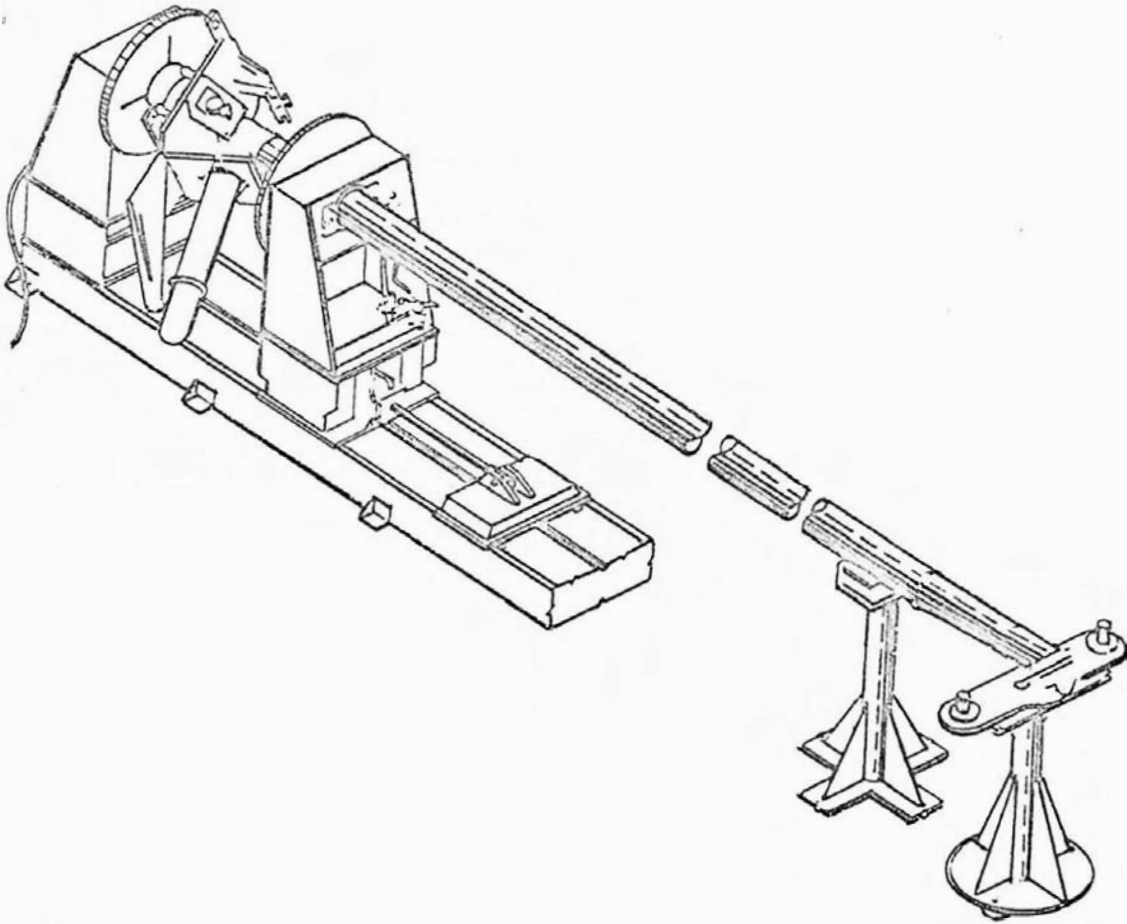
F-1 Engine Actuator Support Assembly Weld Fixture WF-335-32220
